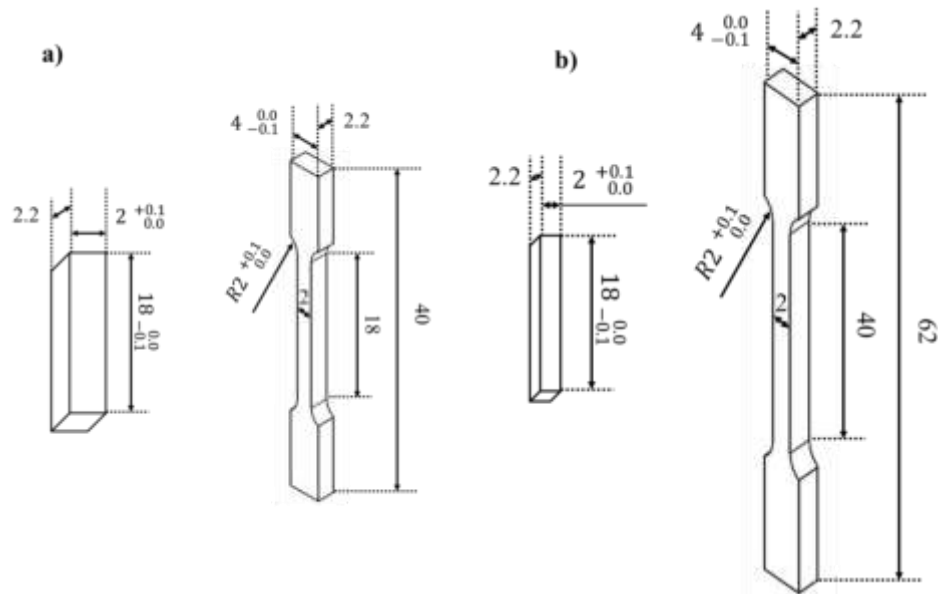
Drawing of the samples (Tensile and Flat bars) a) for all irradiation campaigns b) for 2 dpa H irradiation campaign fabricated with the designated measurements (in mm).
